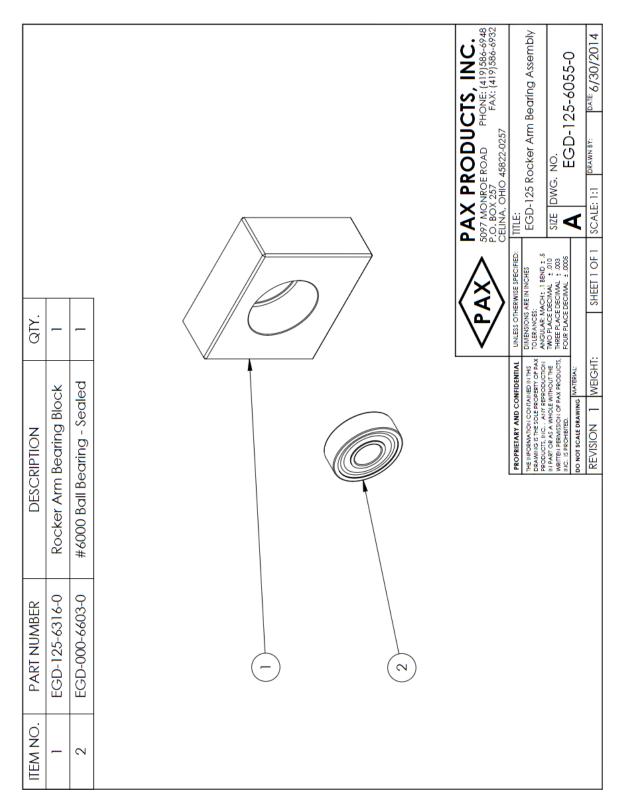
EGD-125 ROCKER BEARING BLOCK ASSEMBLY
